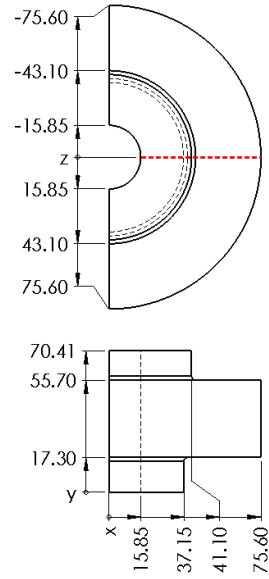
Nickel disk dimensions and measurement location (dimensions in mm)
